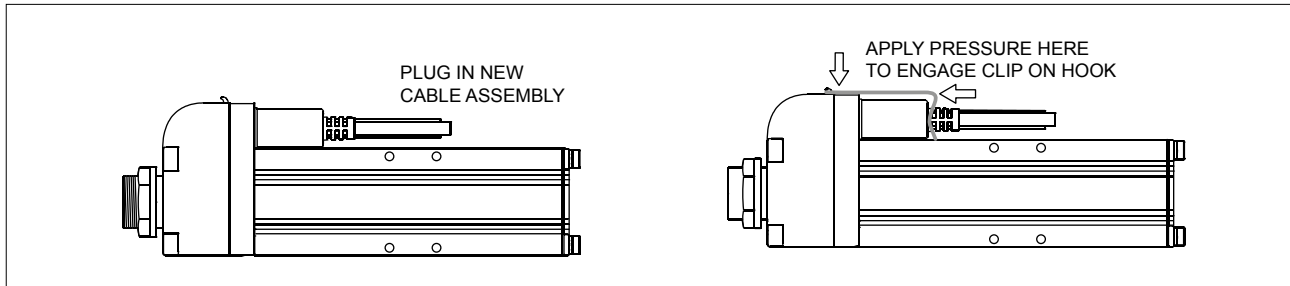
(left) Plugging in the new cable assembly and (right) fitting the retaining clip./
